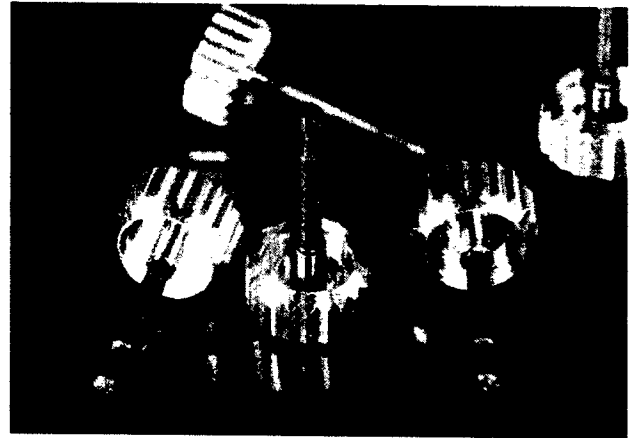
Axes and crowns of mechanical watches welded with the SHADOW technique.
